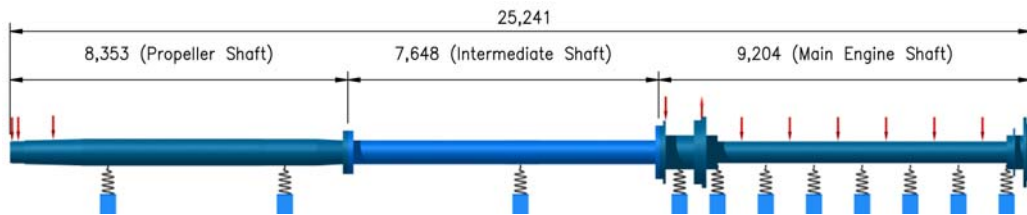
Shafting system of 159,000 DWT crude oil carrier
